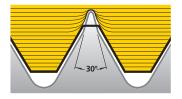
30° thread interferes in the root of the nut thread, eliminating tolerance and locking the assembly.
